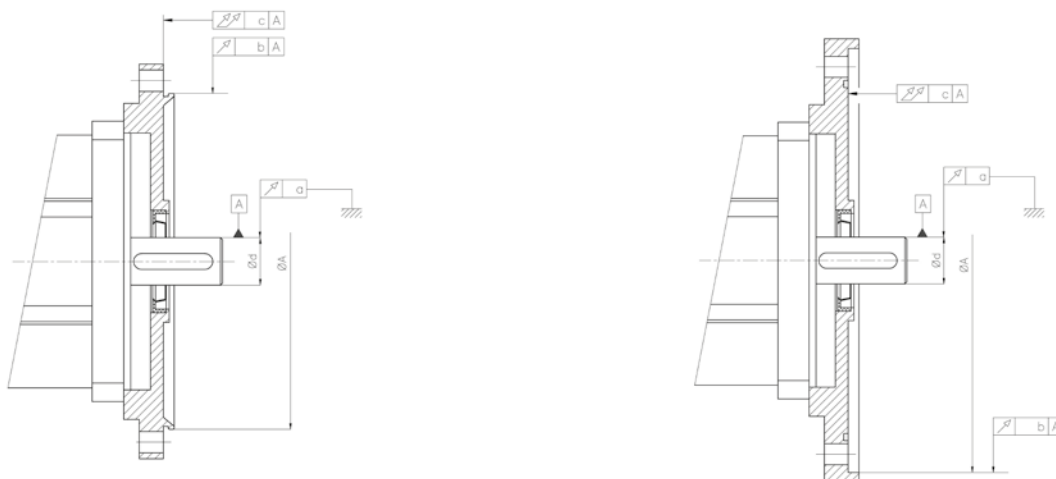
Required tolerances T series / Požadované tolerancie T série
